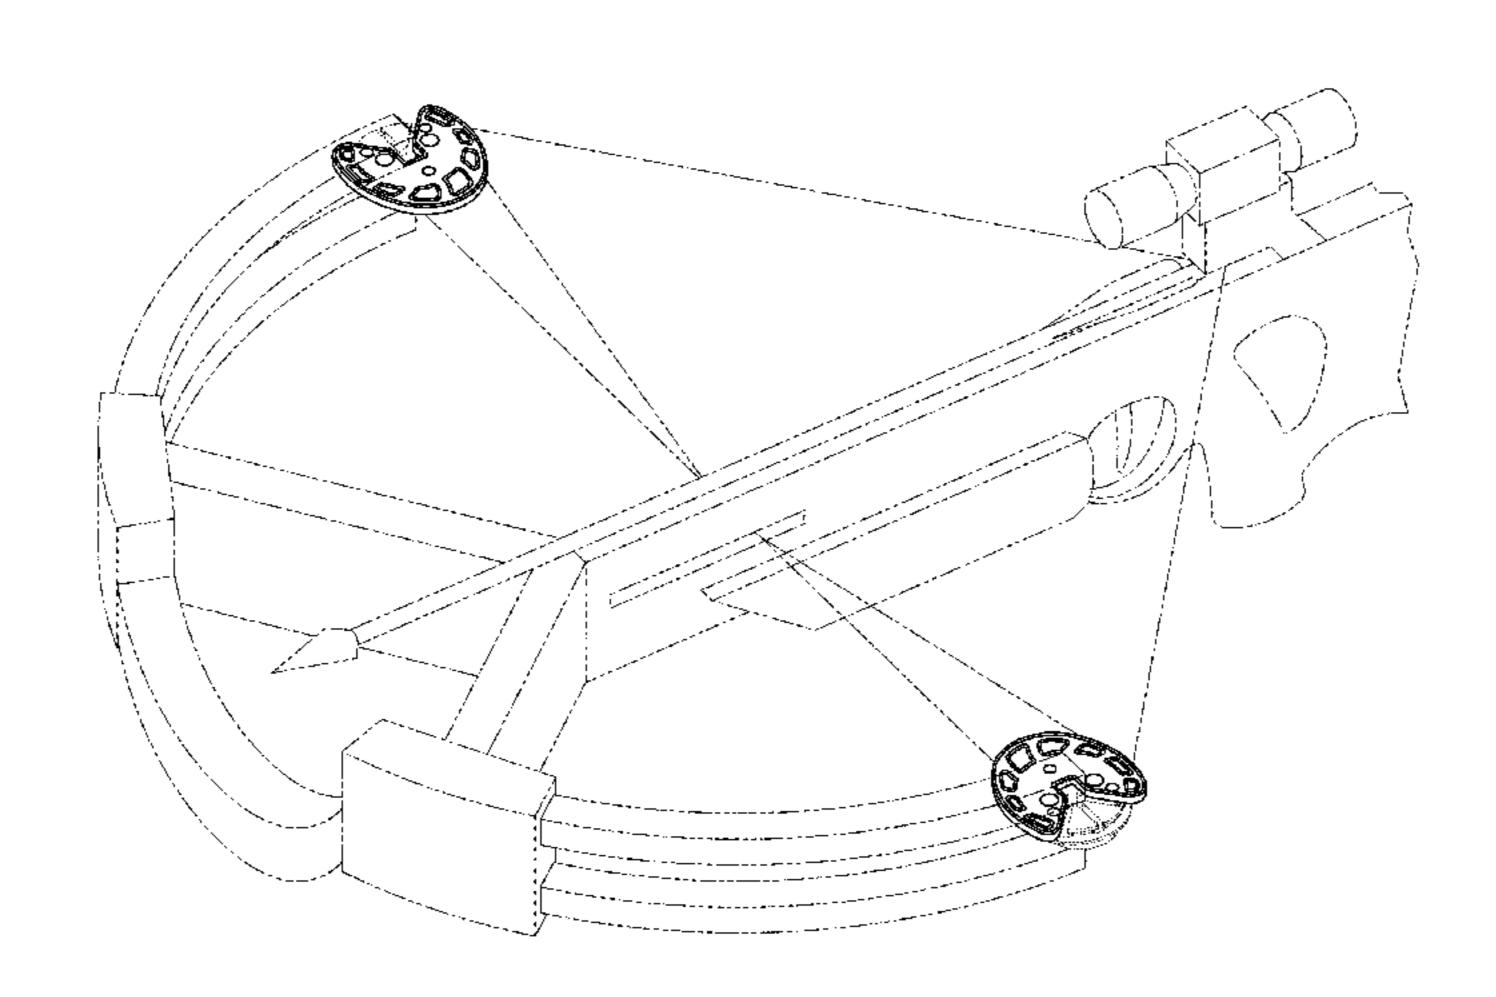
is a top perspective view of a first embodiment showing a compound bow with my new cam cover design, which includes the cam sheet and the cam sheet backing plate, with the cam cover being attached to the cam of the compound bow.
